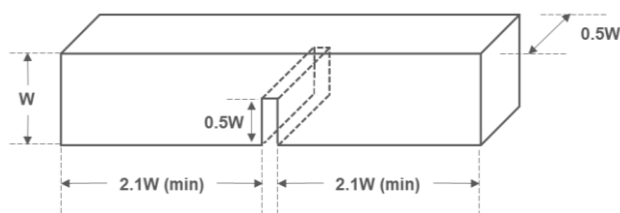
Geometry of single edge notched bending test specimen, from ASTM-399.
